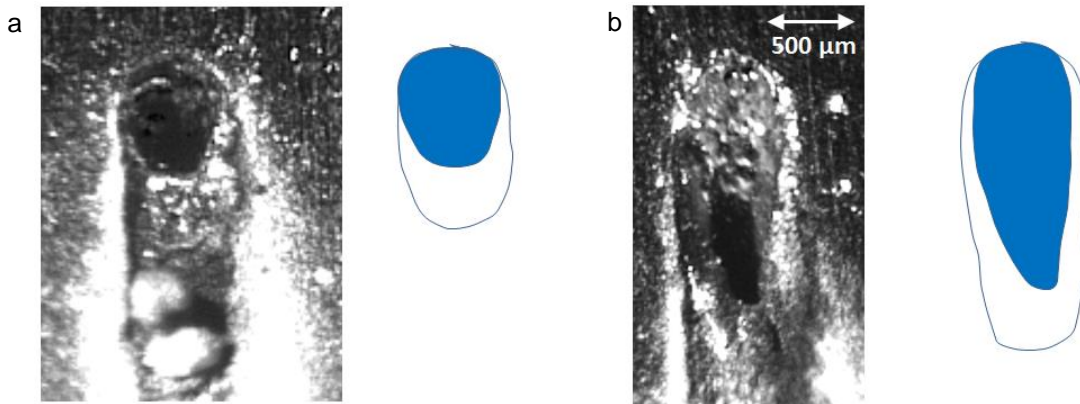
Vapor capillary shape for welding CuZn37 at (a) 2 kW and 33 mm/s and (b) 3 kW and 100 mm/s
